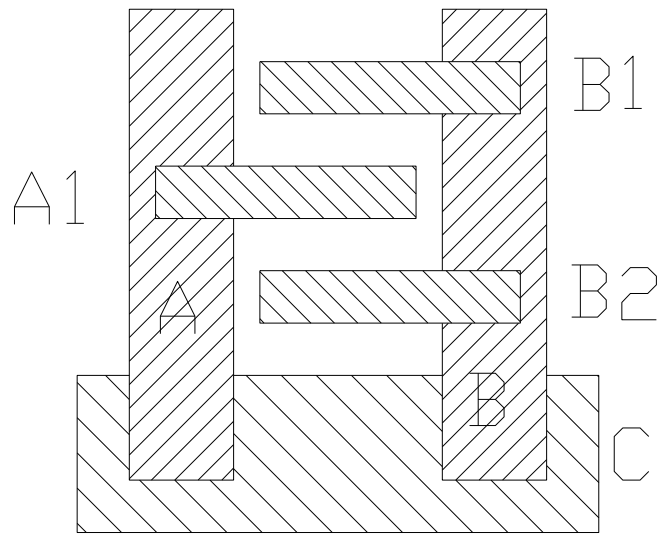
A product that can be assembled with a NC-S-L-M assembly
